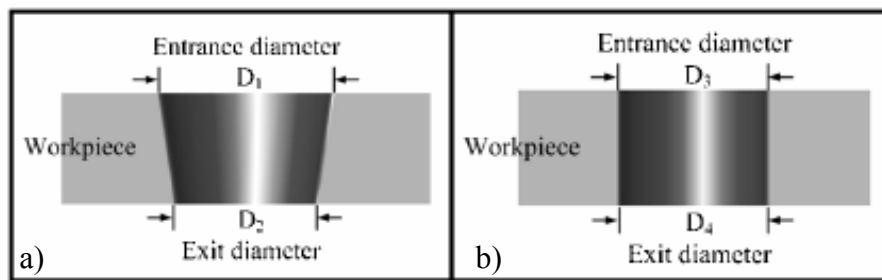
Schematic views of (a) tapered shape hole and (b) exactly cylindrical shape hole (Hung et al., 2006)
